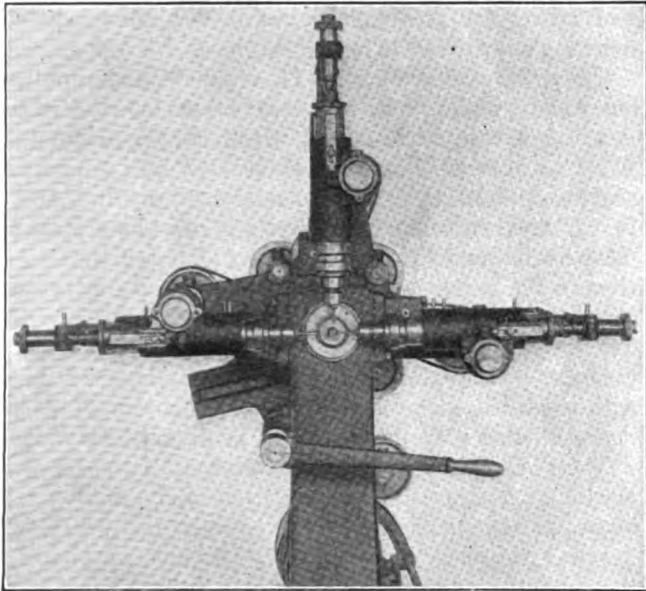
THREE-SPINDLE TAPPING MACHINE
